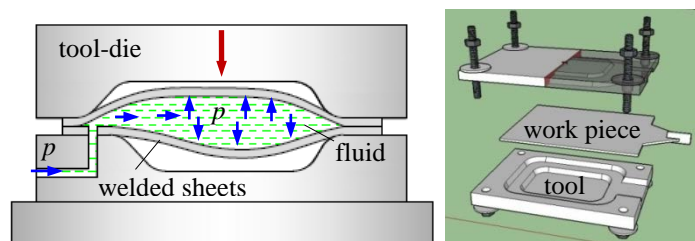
Process scheme (a), tool and work piece (b) for hydroforming of welded sheets
